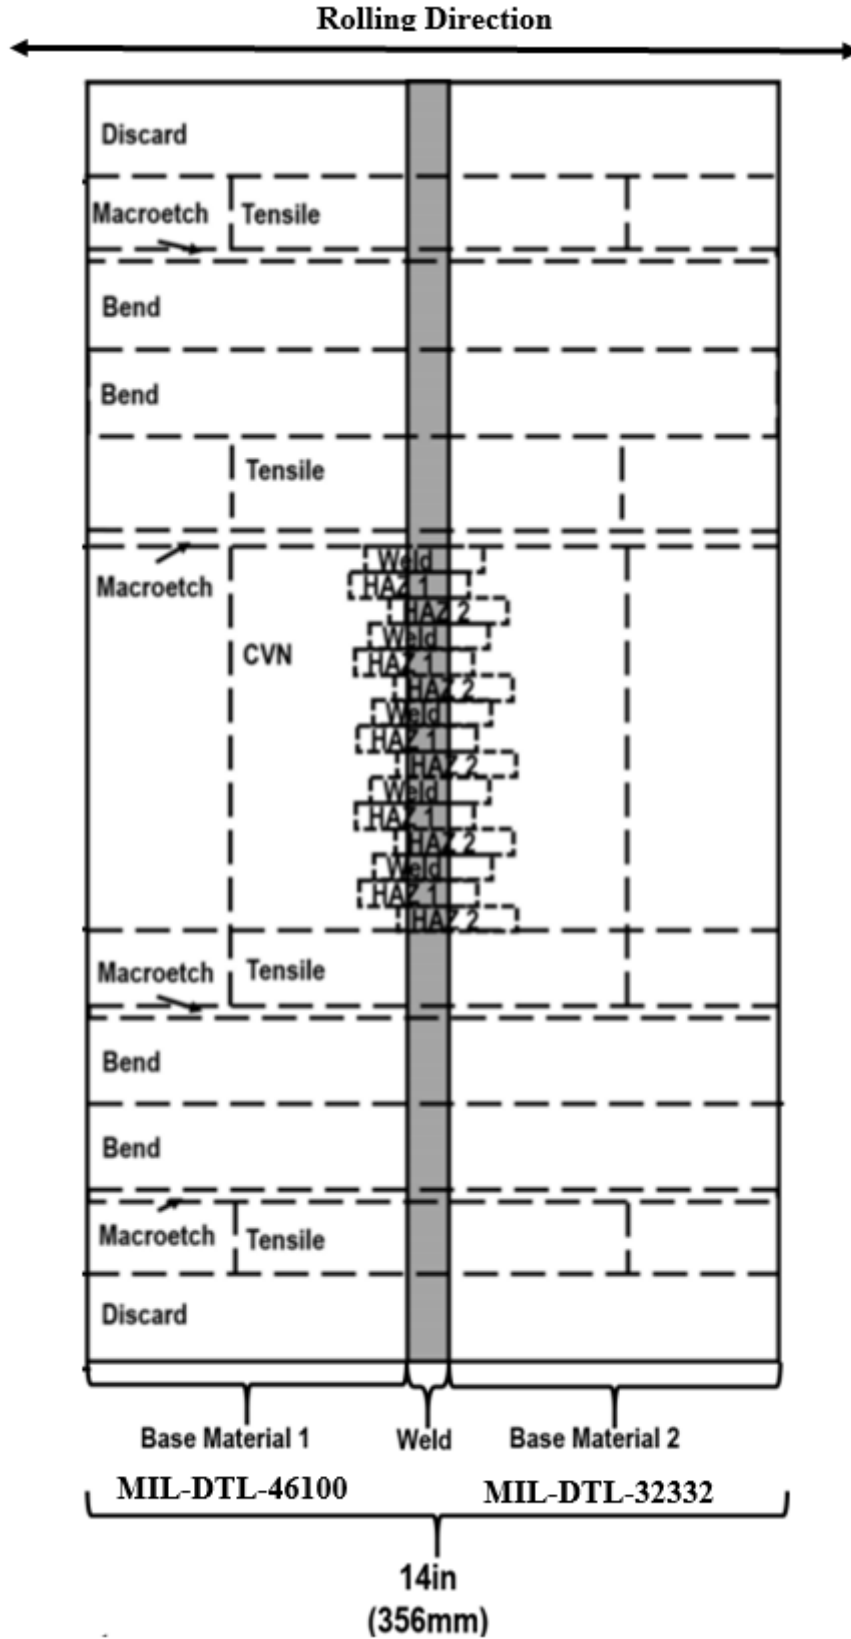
, Sketch of the coupon(s) that illustrates the approximate location of the blanks that were removed from mechanical testing. This sketch was copied from MIL-STD-3040, Rev. A, Figure 4.
